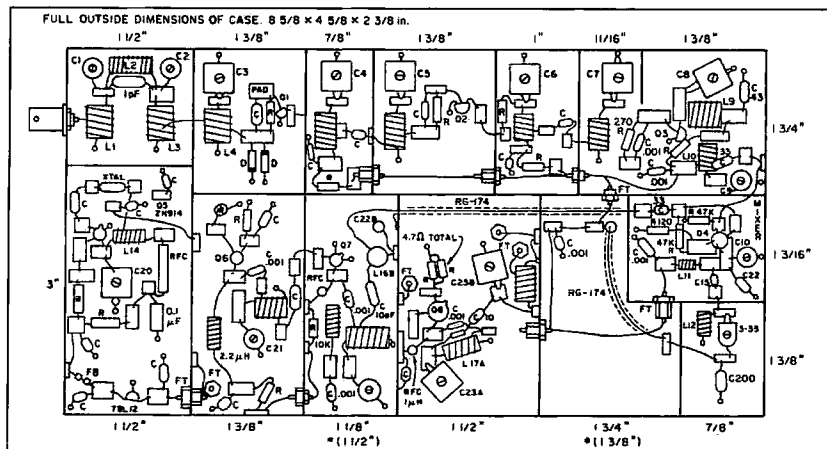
Major parts positioning (approximate dimensions) for the receiver and oscillator, top section.
